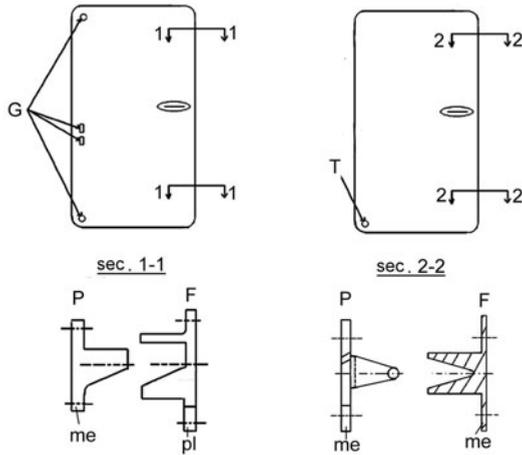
Position and section of wedges to control sliding doors attitude. P: door; F: body side; me: metal; pl: plastic; G: rubber pad; T: rubber dumper.
